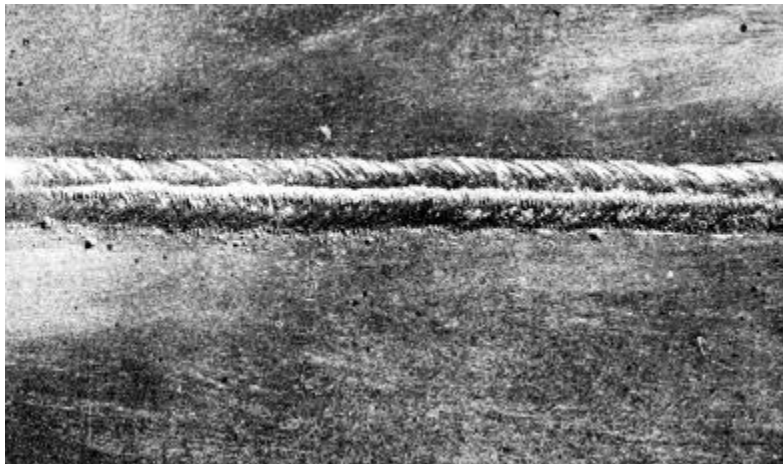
Broad Indication of Subsurface Discontinuity in a Weld
